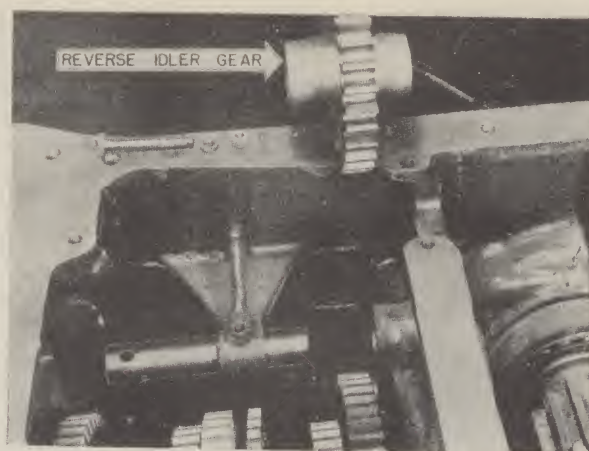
Removal of reverse idler gear from Super 99 four speed transmission.
